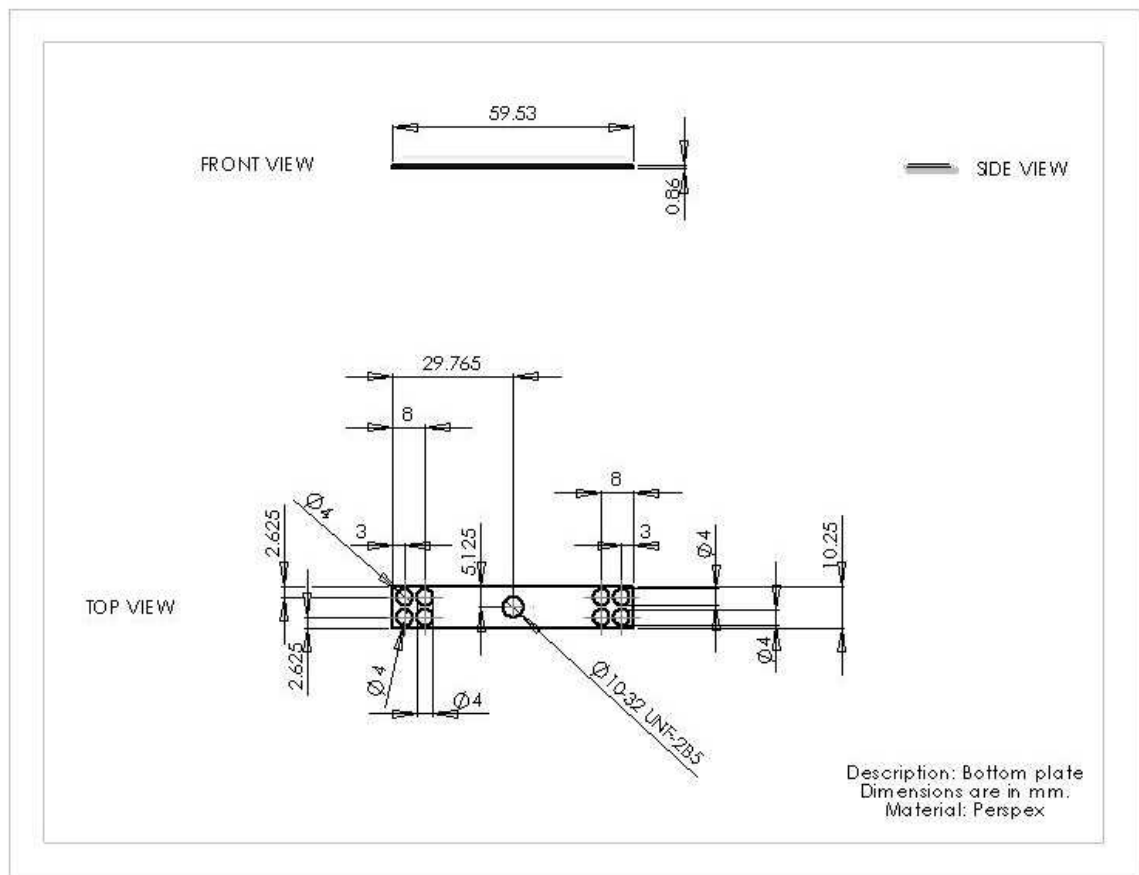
Drawing of the bottom layer of the MR ATVA.
